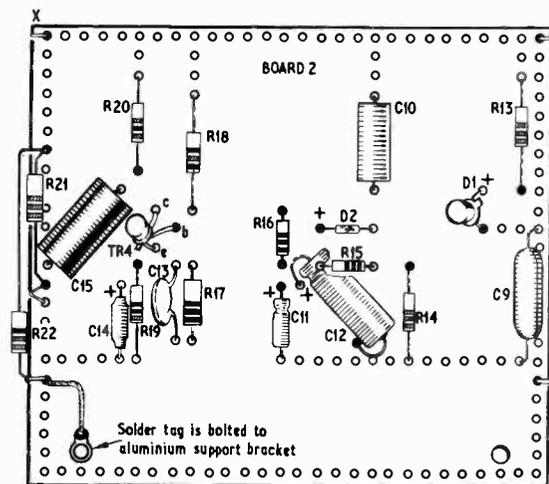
(right). Component assembly and wiring details for drum brush voicer circuit
